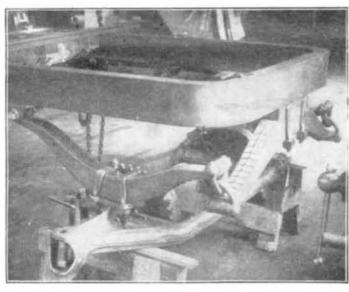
Rear Axle, Showing Flattened End for Wheel to Turn on, and Driving Sprocket Behind Spring.
